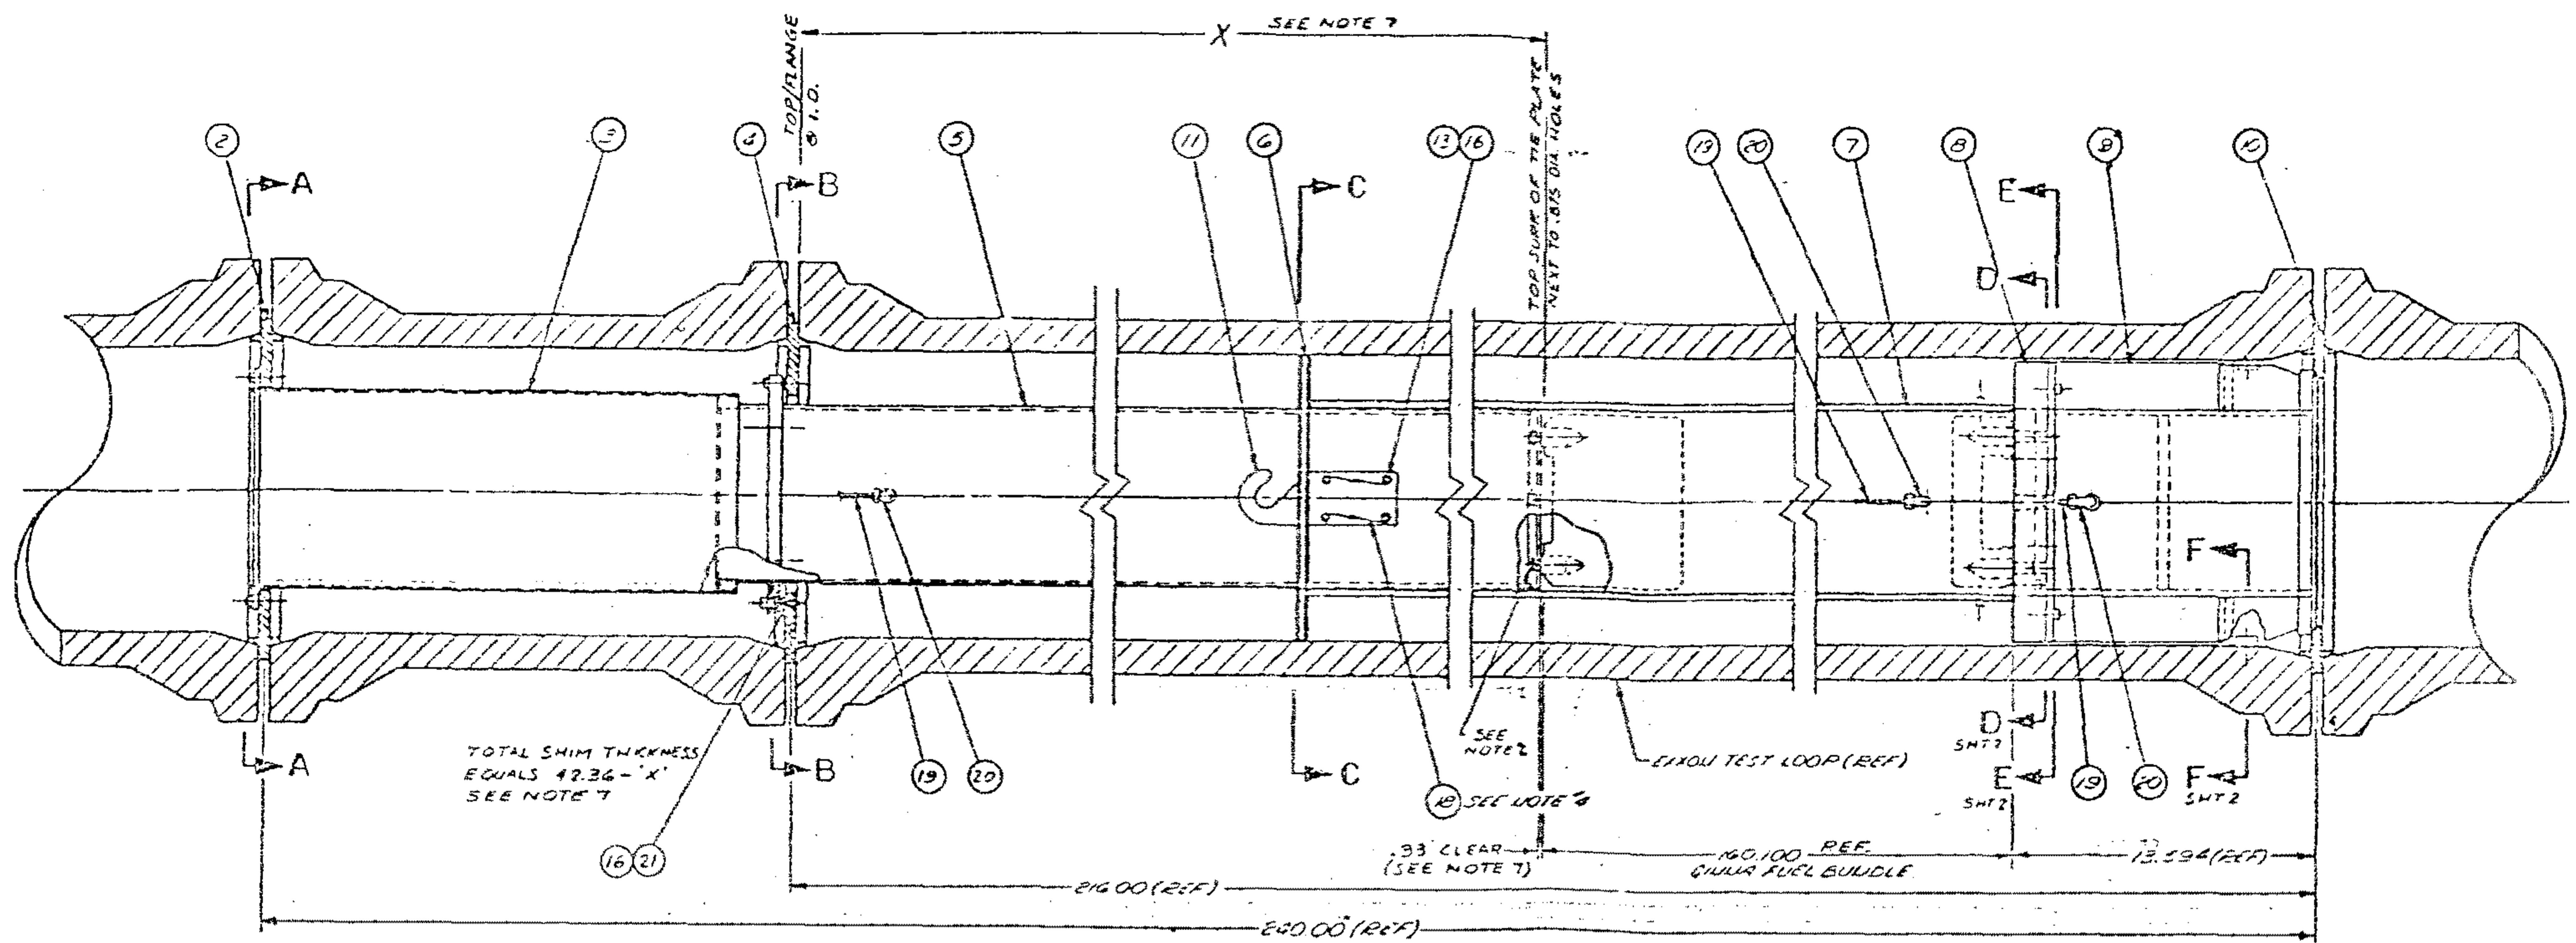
PWR - Hot Test Loop Piping Elevations
